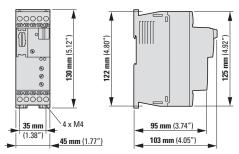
Dimension drawing DS7 with SWD – Size 1 (up to 12 A)
